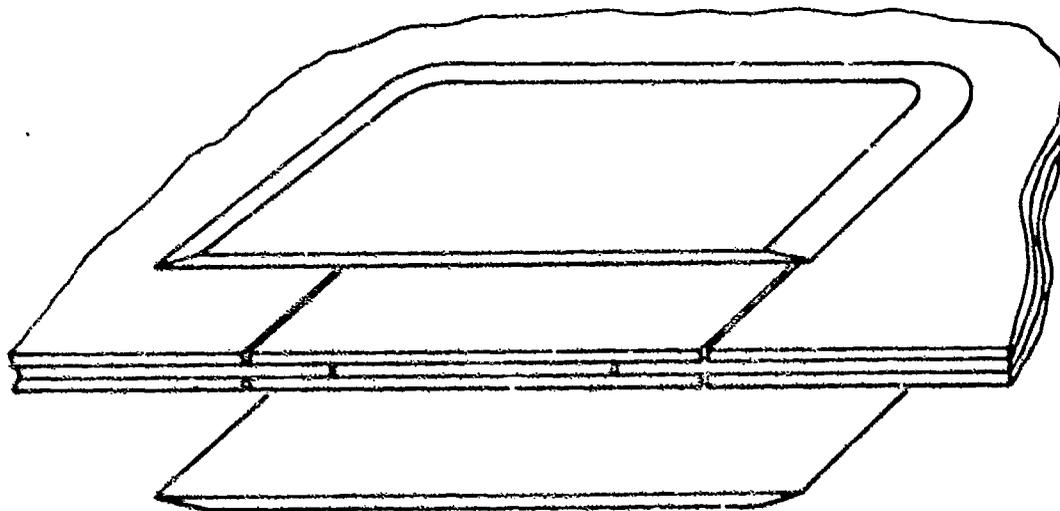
TYPICAL FASTENER INSTALLATION FOR REWORK OF DEBONDED SPLICES AND/OR DOUBLERS
